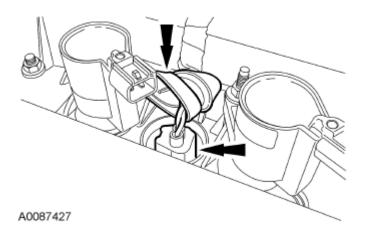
Locating Ignition Coil-On-Plugs And Camshaft Position Sensor Electrical Connectors Courtesy of FORD MOTOR CO.
